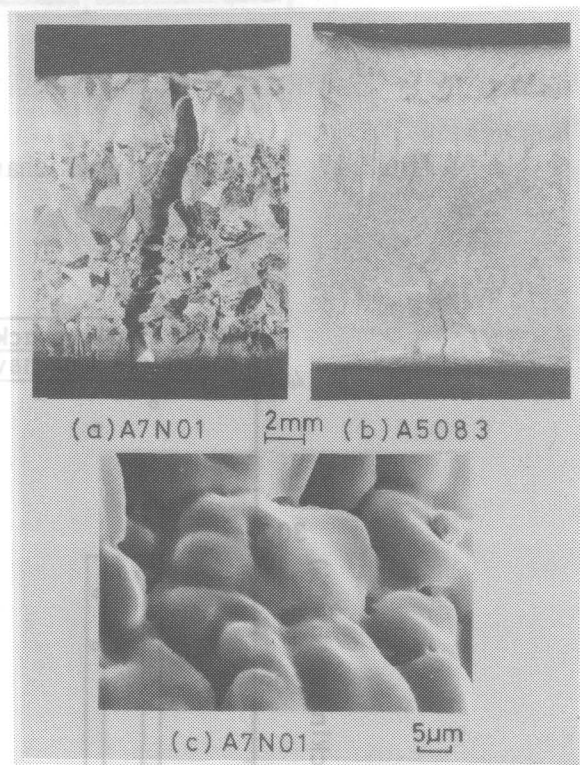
Typical appearance of ring casted specimen showing cracking and cracked surface.
